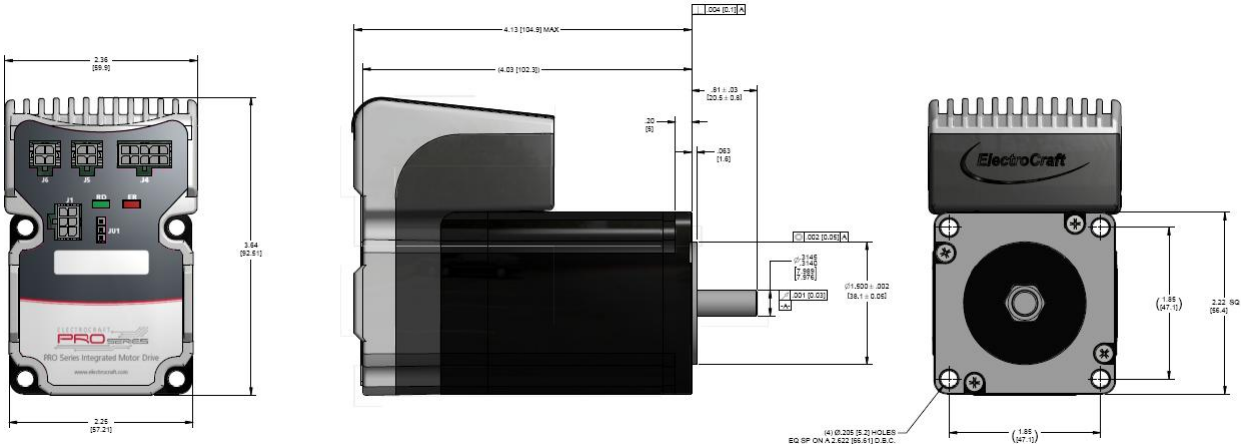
PT56-A170V48A-0-D-CAN mechanical dimensions.
